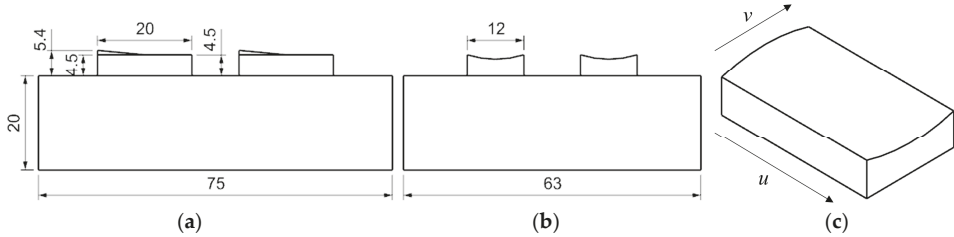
Design of Surface two; (a) front view; (b) side view; (c) isometric view.
